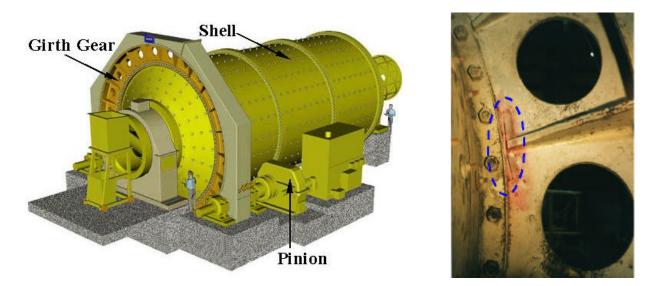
a) Schematic of an Industrial ball mill [5]. b) A typical crack in the rear side of the gear.
